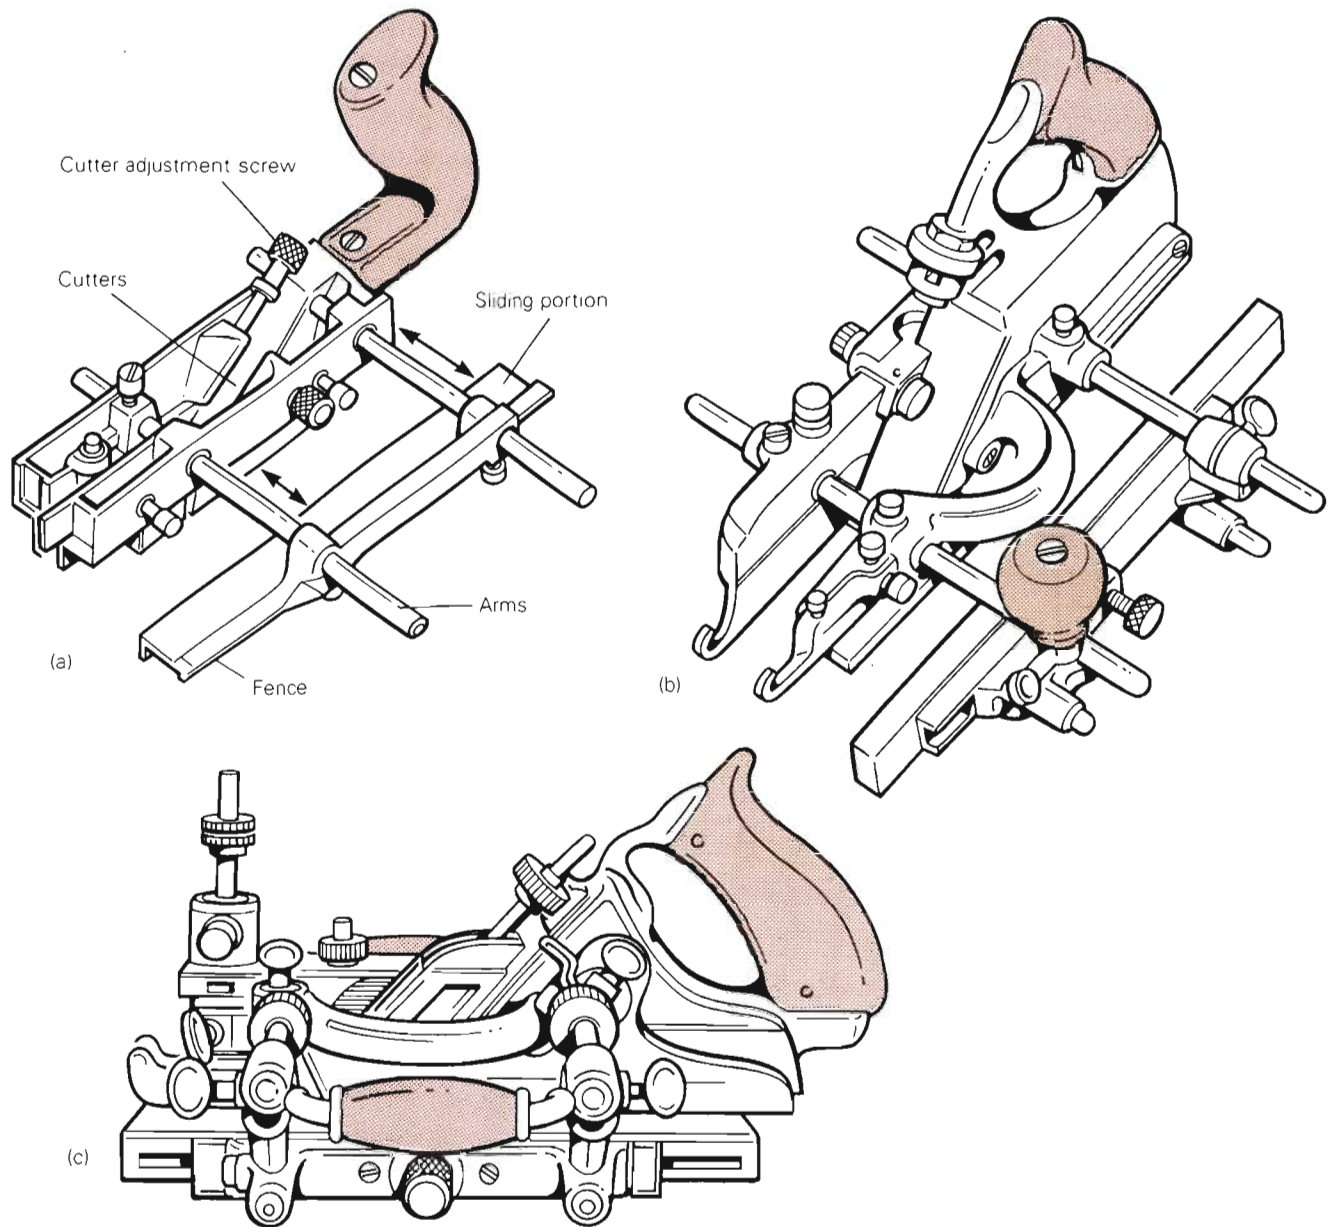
Multi-purpose planes: (a) combination plane, (b) multi-plane, (c) universal plane.
